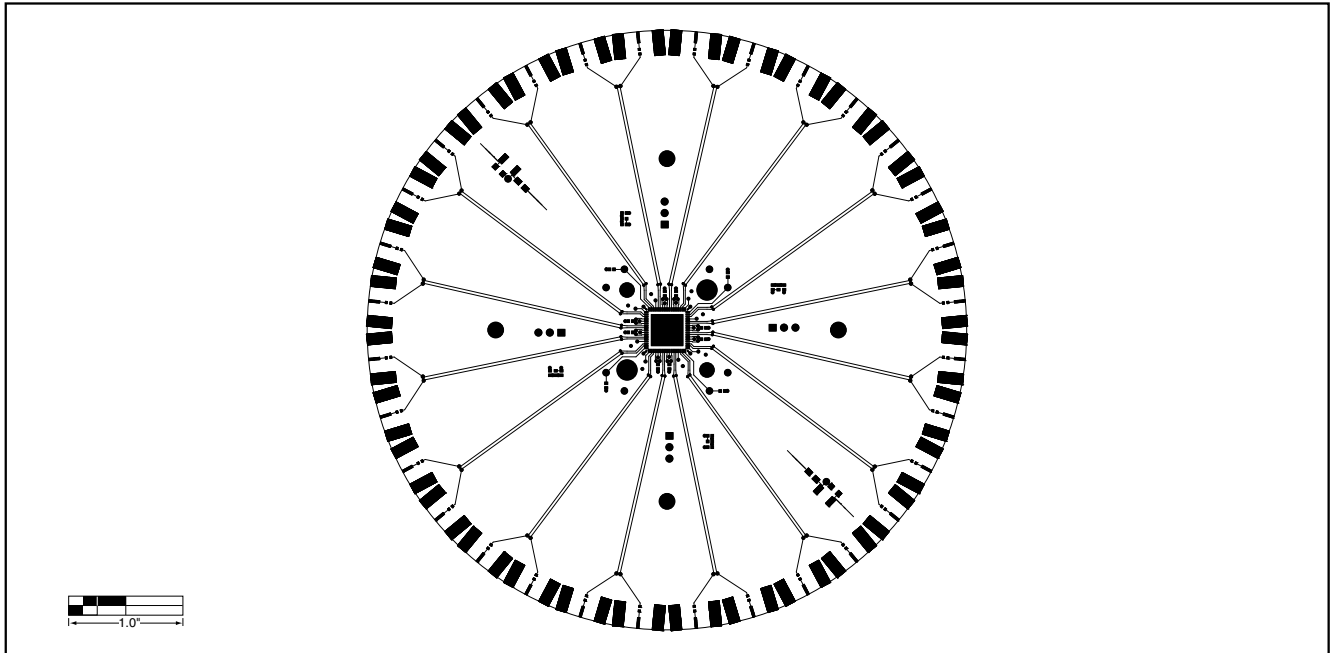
MAX3802 EV Kit PC Board Layout—Component Side
